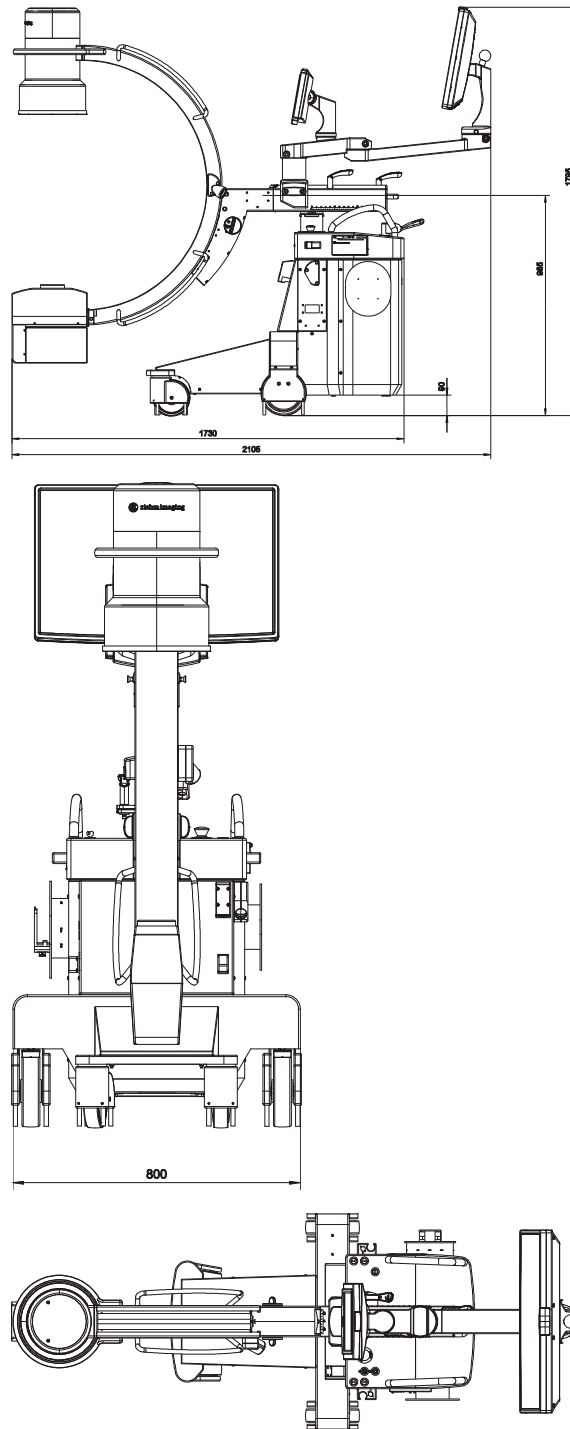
Dimensions of Ziehm Solo Option Portable M2 mobile stand
